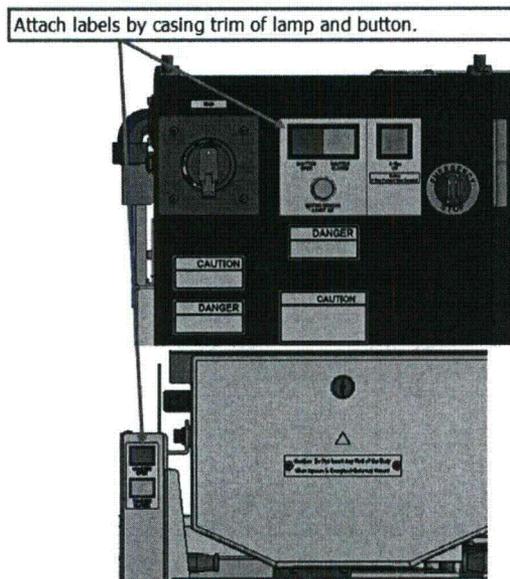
Proposed design showing attachment of labels using the casing trim of lamps and/or buttons.
